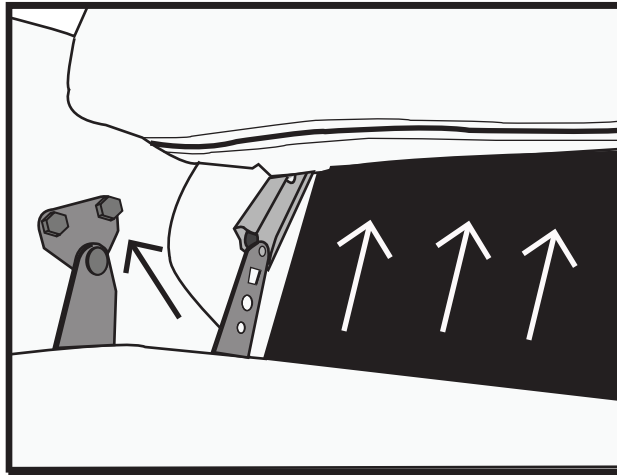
Now pull the Back until the metal cap has successfully been removed from the mechanism. Now two bolts on each arm from the mechanism are accessible. These will need to be removed.
